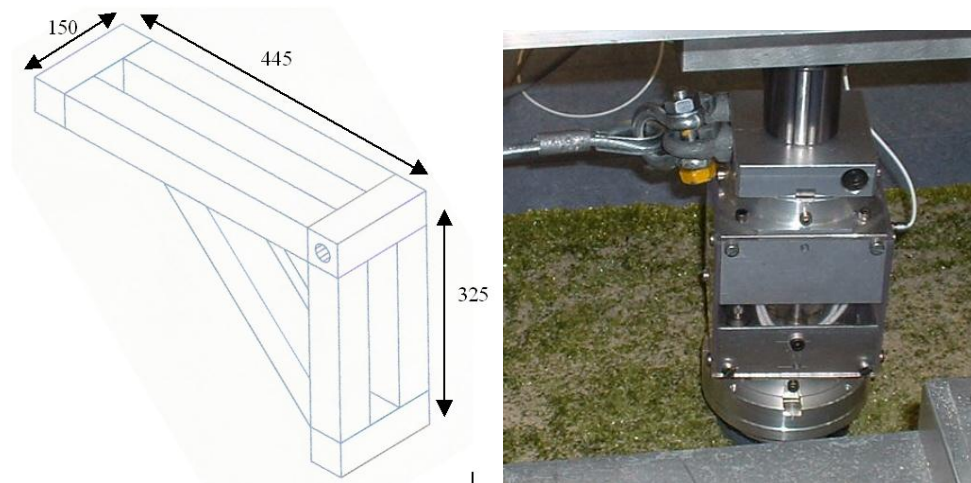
L-crank lever (left) and steel cable attachment to the vertical shaft (right)
